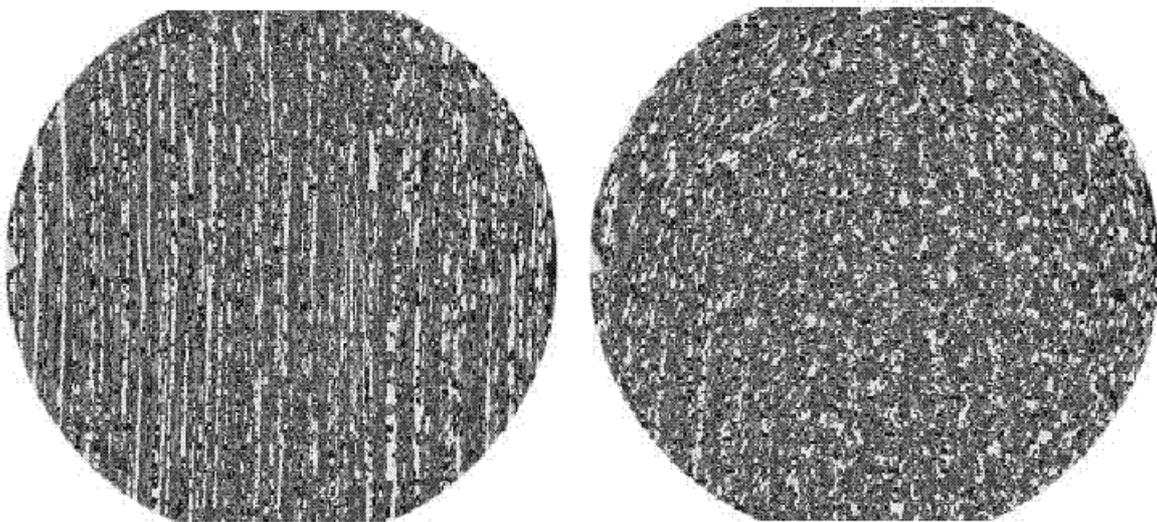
Drilled steel 15230.3 surface morphology (sharp and worn-out tool)
